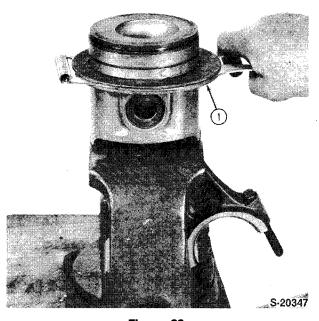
Piston Ring Removal 1. Piston Ring Expander Tool
